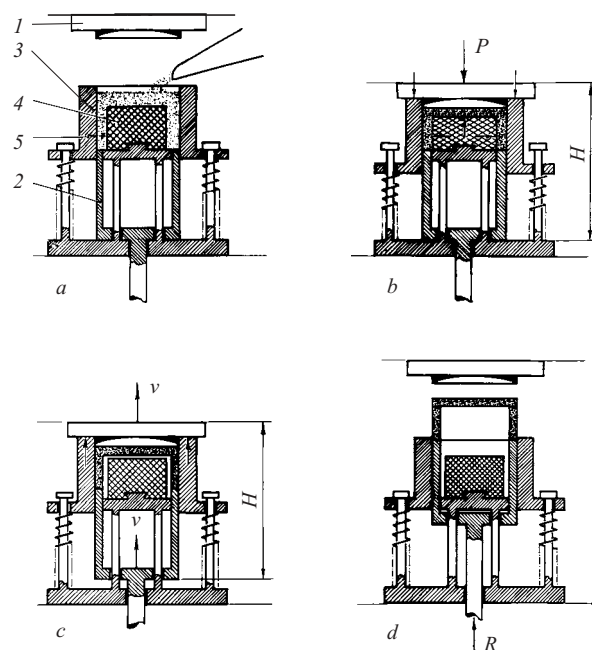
The scheme of design and operation of a mold for quasi-isostatic molding of saggers: a) charging of molding powder; b) molding; c) removal of pressure; d) pushing out the finished article.
